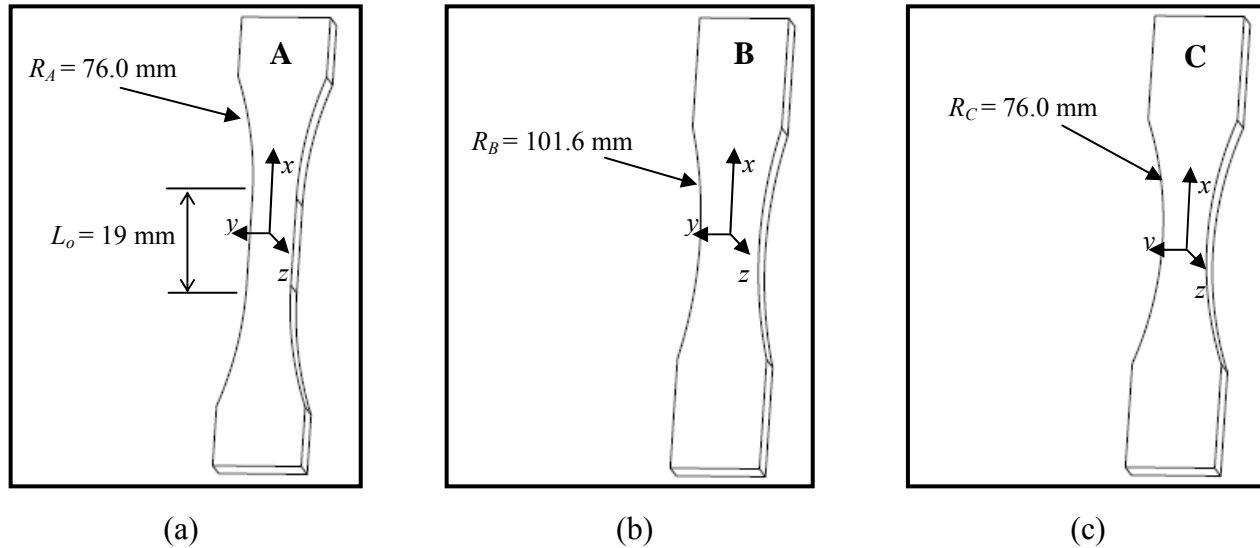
Specimen geometries: (a) uniform test section (b) large hourglass and (c) thin hourglass.
